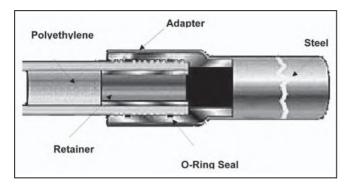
Standard Fitting for PE Pipe to Steel Pipe Transition
